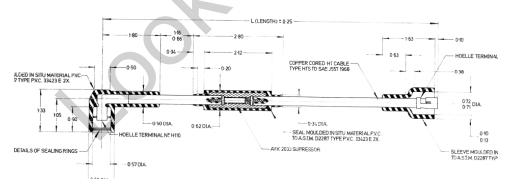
High tension cable distributor to coil AYH9681 (MYH4153).
